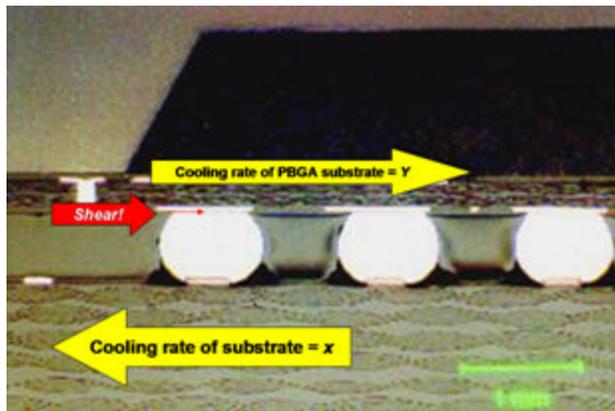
Cross Section of BGA Revealing Shearing Zone
